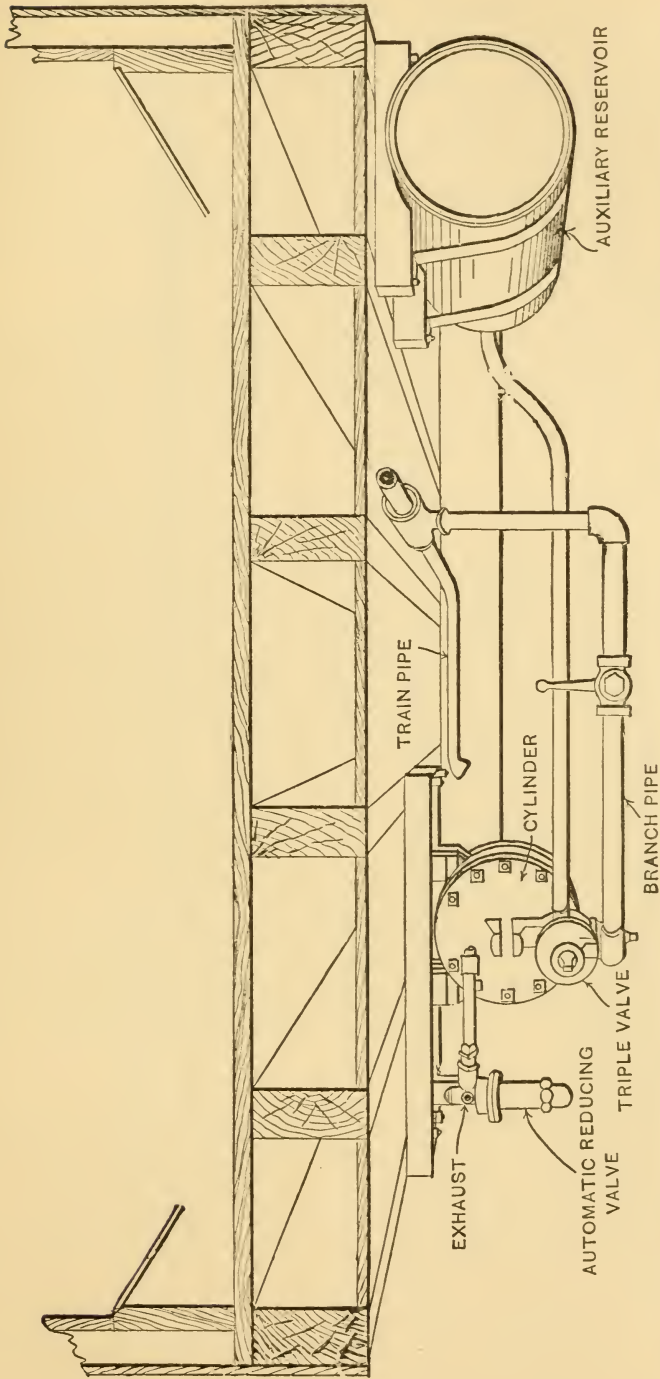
SHOWING LOCATION OF HIGH-SPEED AUTOMATIC REDUCING VALVE UNDER CAR.
